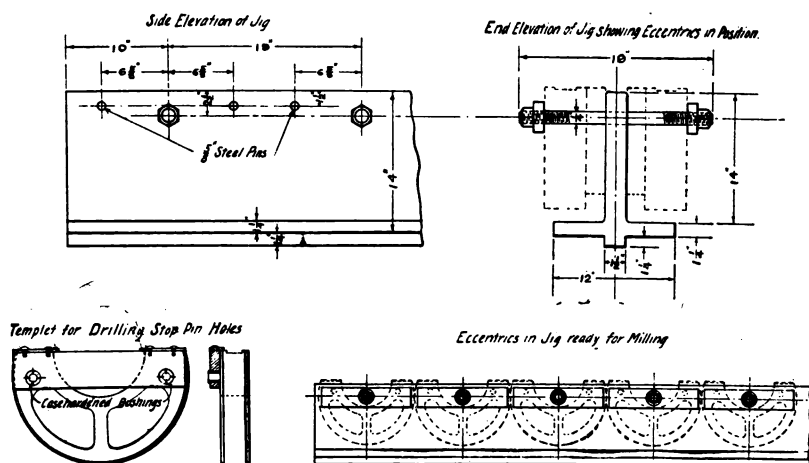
ELEVATIONS AND GENERAL PLAN OF SPECIAL MILLING JIG FOR FINISHING THE JOINT ON ECCENTRIC HALVES. THE CASTINGS ARE HELD IN THE PROPER POSITION BY STEEL PINS INSERTED IN HOLES DRILLED IN THE ECCENTRIC HALVES. A DRILLING JIG INSURES ACCURACY IN THE LOCATION OF THE HOLES.
